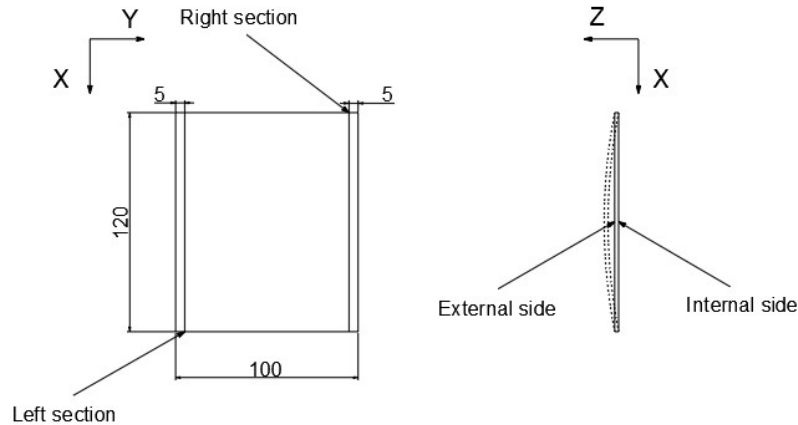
Sketches about location of each section and side on the sample plate (dimensions in mm)
